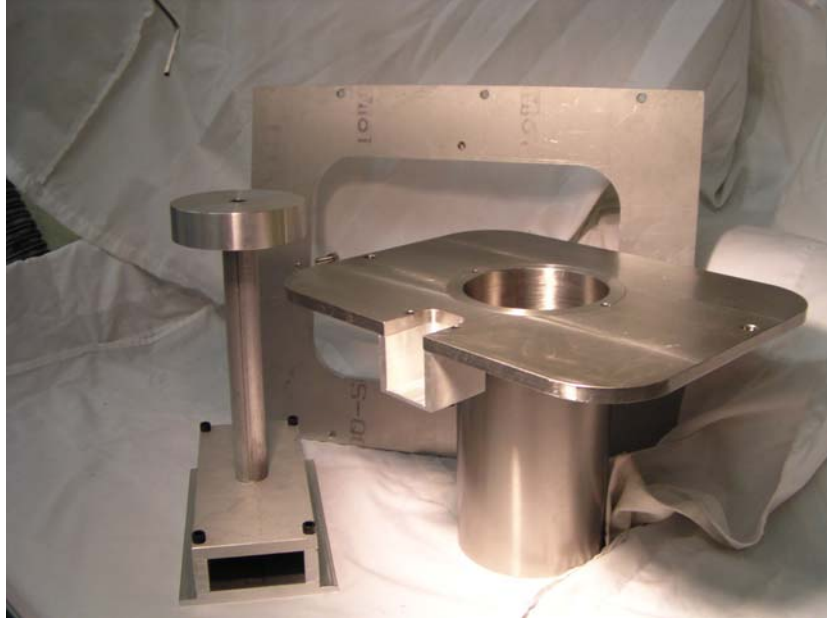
SVI : Feed Insert, Piston and Mounting Plate
